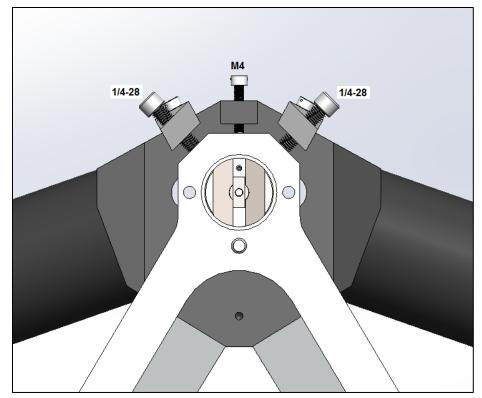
Groove Lock on axis position components. Note that Swing-Arm is M4 and Groove Lock components are 1/4-28. Hardware is drilled head for safety wire after final alignment. [Figure from Reference 1]
